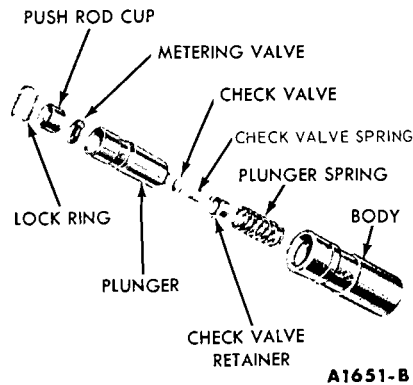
Type I Hydraulic Valve Lifter Assembly
